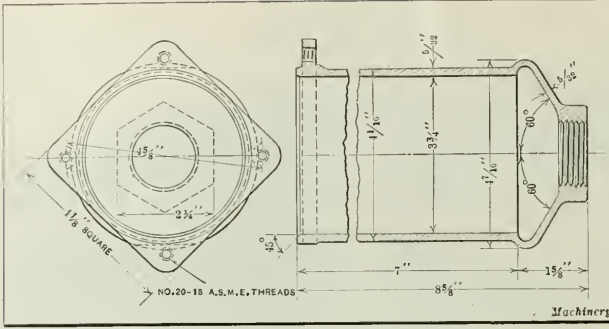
Pump Cylinder machined with Set-up illustrated in Fig. 5
